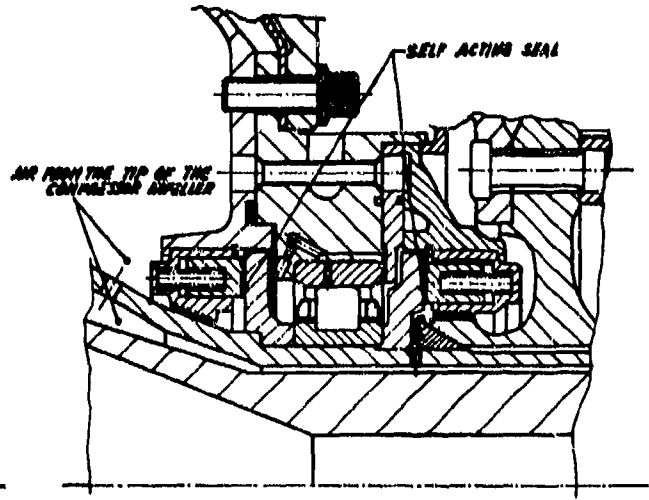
Possible oil seal pressurization with air of No. 2 bearing in figure 1.
